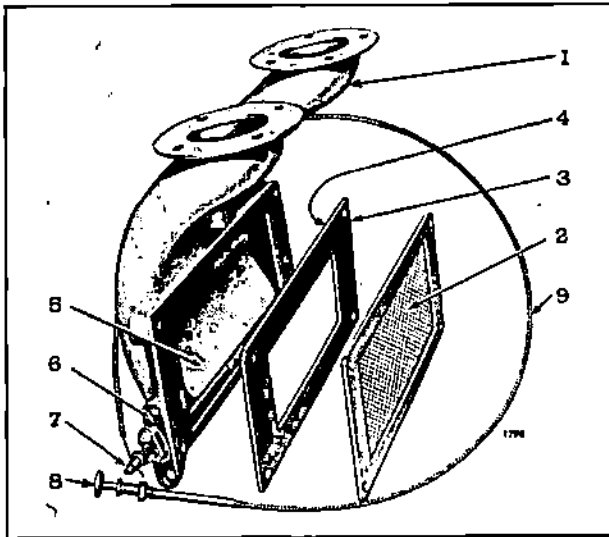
Manually Operated Engine Shut-Down Assembly
